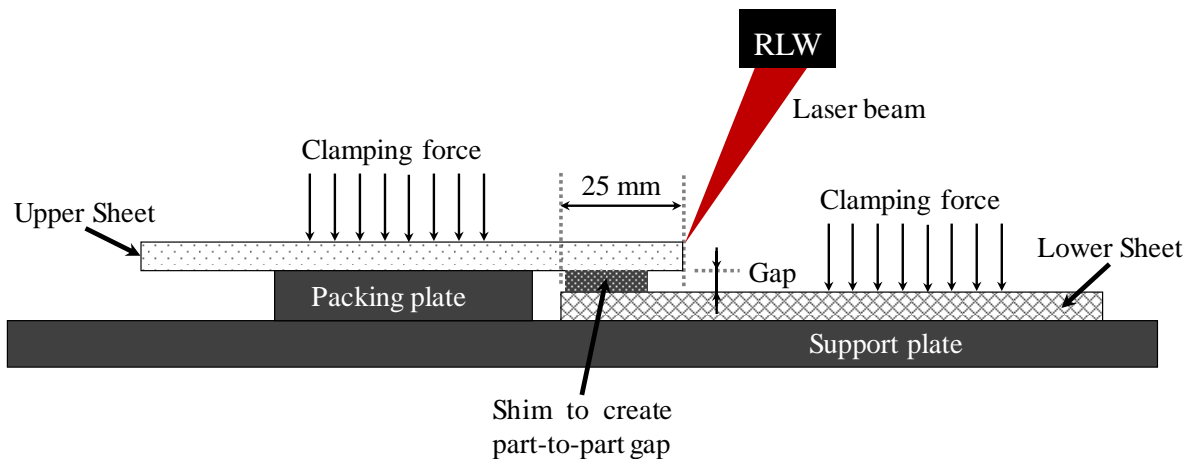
Schematic of the parent assembly configuration to create gap-bridged fillet edge weld using RLW.
